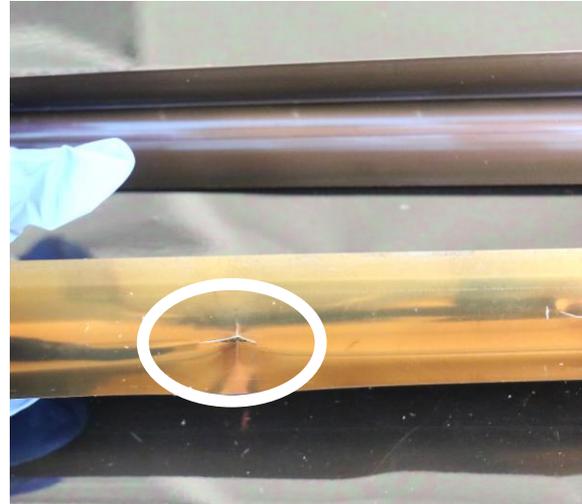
Damage to TRAC boom observed during handling due to improper bending.
